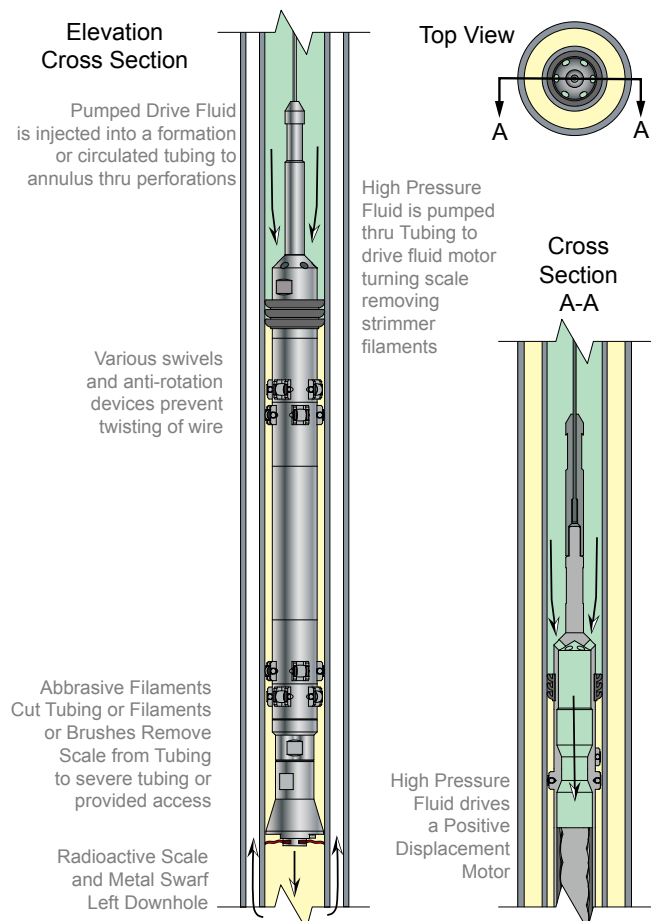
Wireline Fluid Motor Cleaning or Cut
